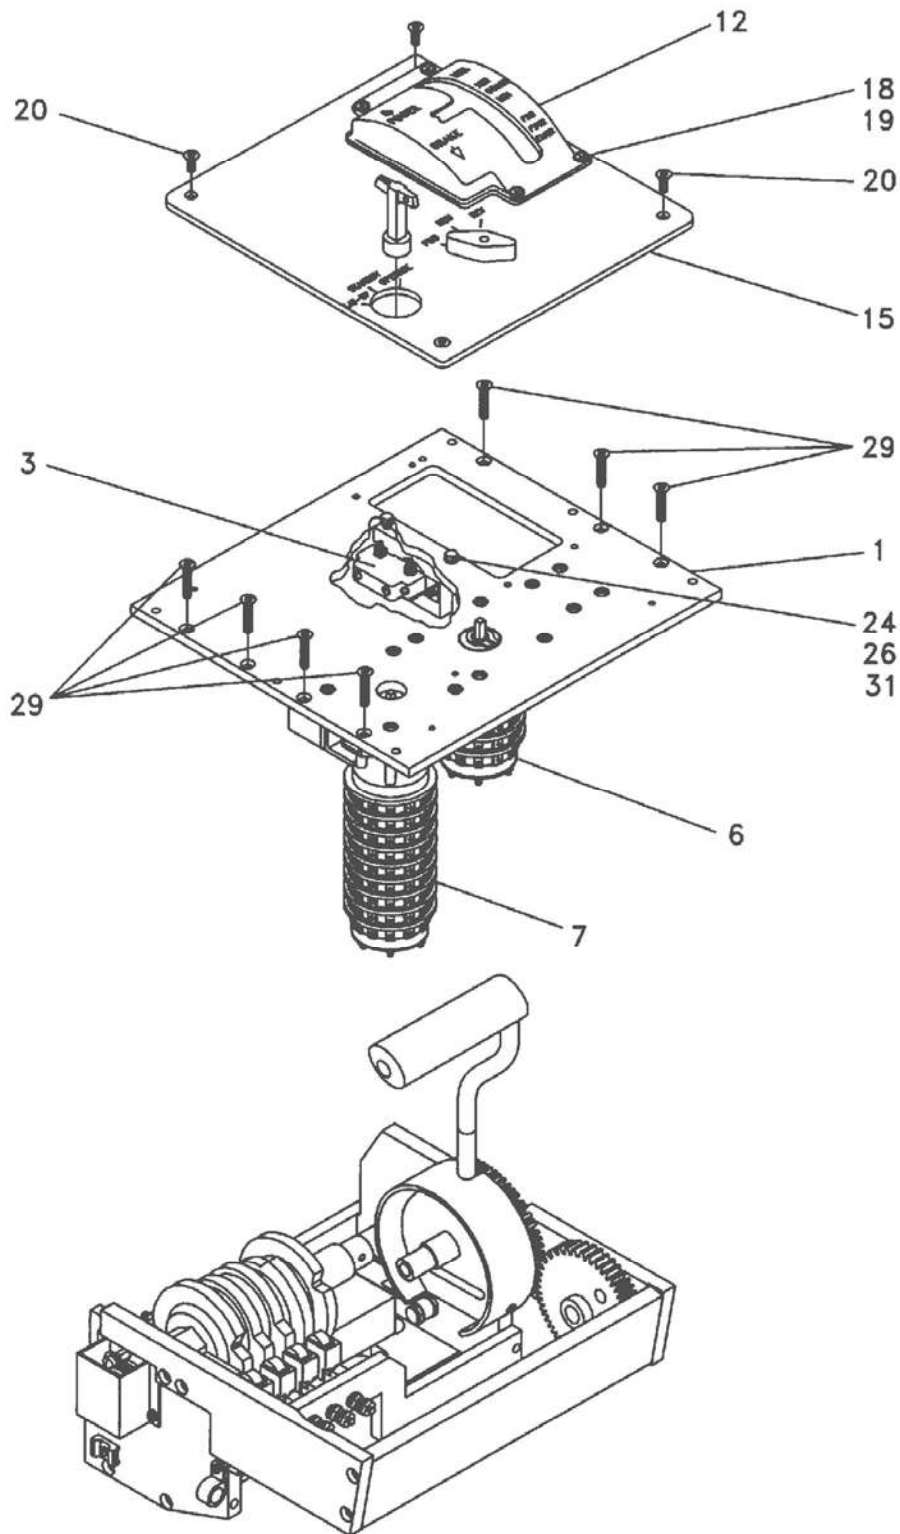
Master Controller Lubrication (Sheet 2 of 3)
